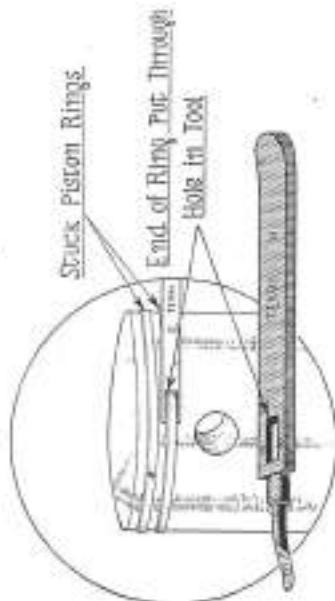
A HANDY TOOL FOR REMOVING STUCK PISTON RINGS
